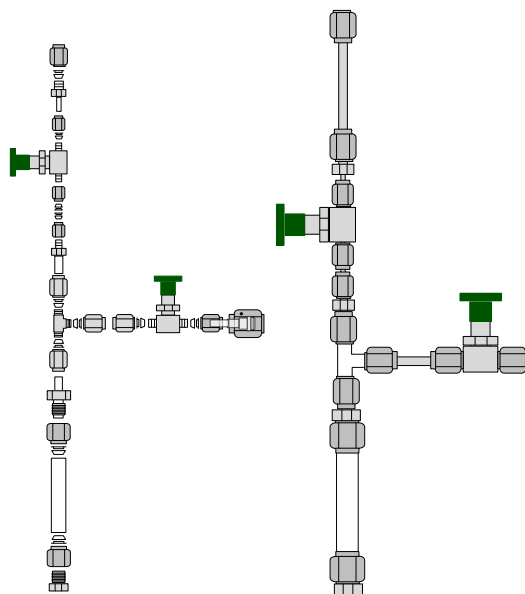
Demonstration CHS Bubbler Design Parts and Assembly. This figure shows the design, disassembled (left, without extension tubes or straw) and assembled (right). This design was relatively inexpensive but resulted in many Swagelok seals and stress accumulation under moment arm forces.
